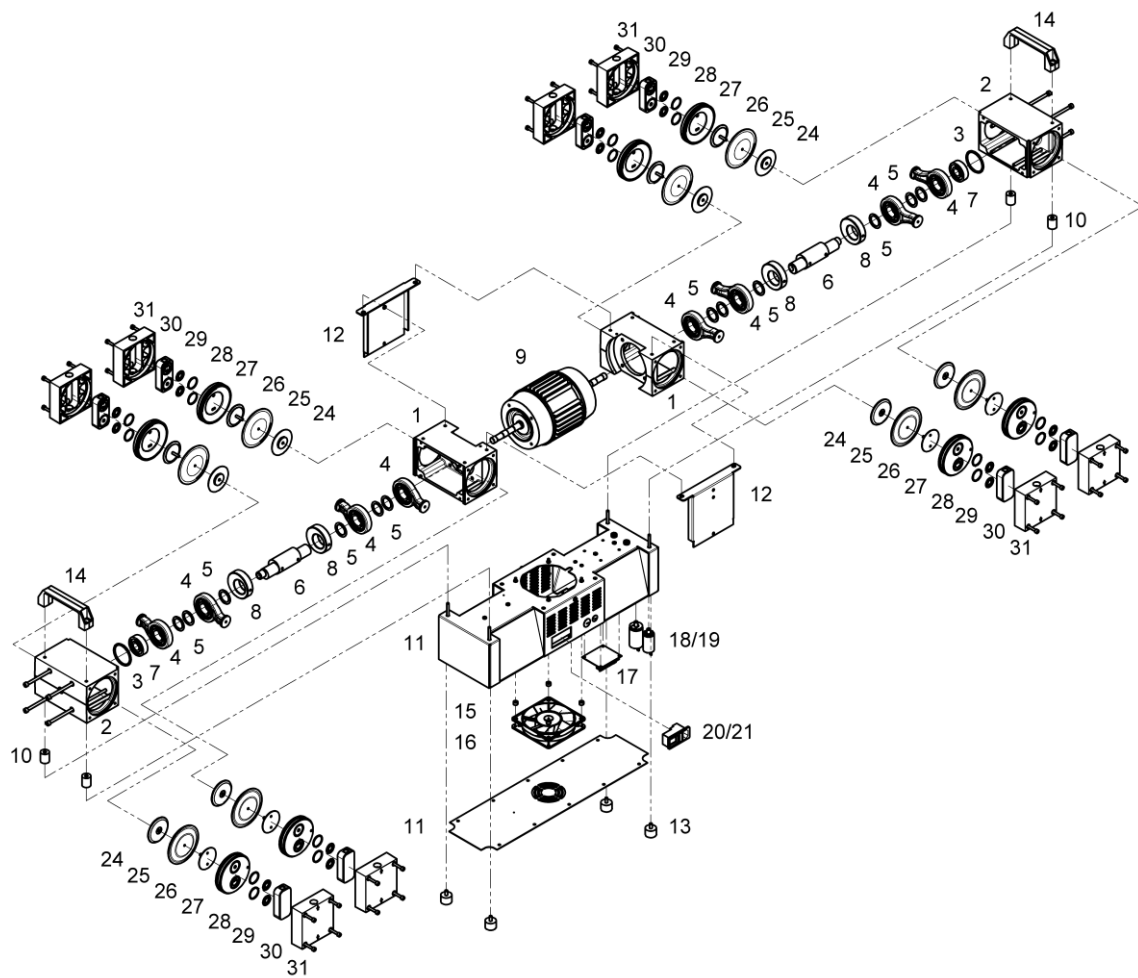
Exploded view - Basic structure (Diaphragm pumps 8-headed)
